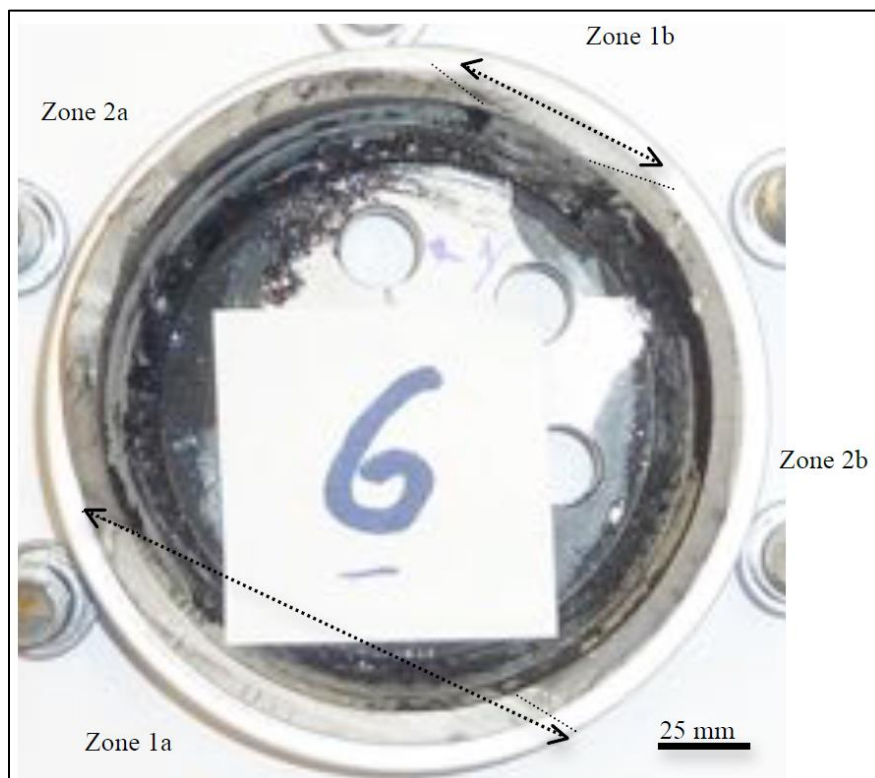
fracture surface of the fixation ring of propeller blade 2; indication of particular zones (the number 6 is an identification tag used by the lab)
